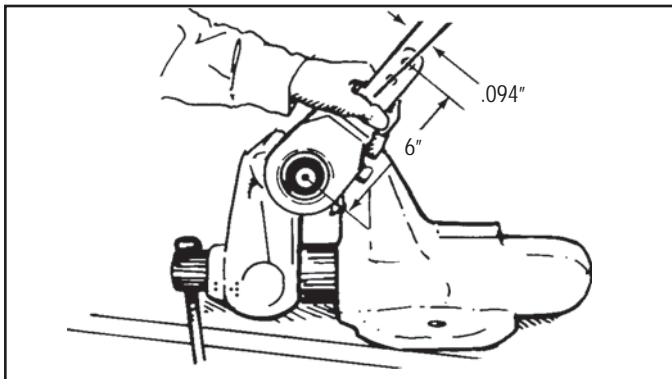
CHECKING SLACK ADJUSTER BACKLASH
